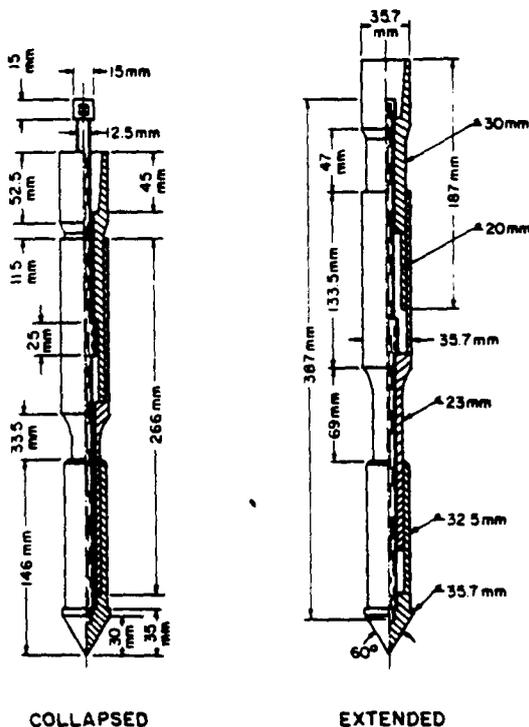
Example of a Mechanical Friction-Cone Penetrometer Tip (Begemann Friction-Cone)
